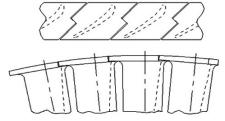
Tongue and Groove and Z-lock Shroud Design.
